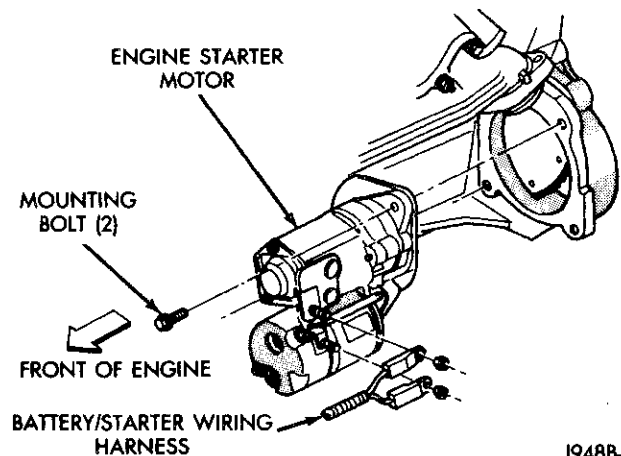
Starter Connector Remove/Install - V-6/V-8 Engine
